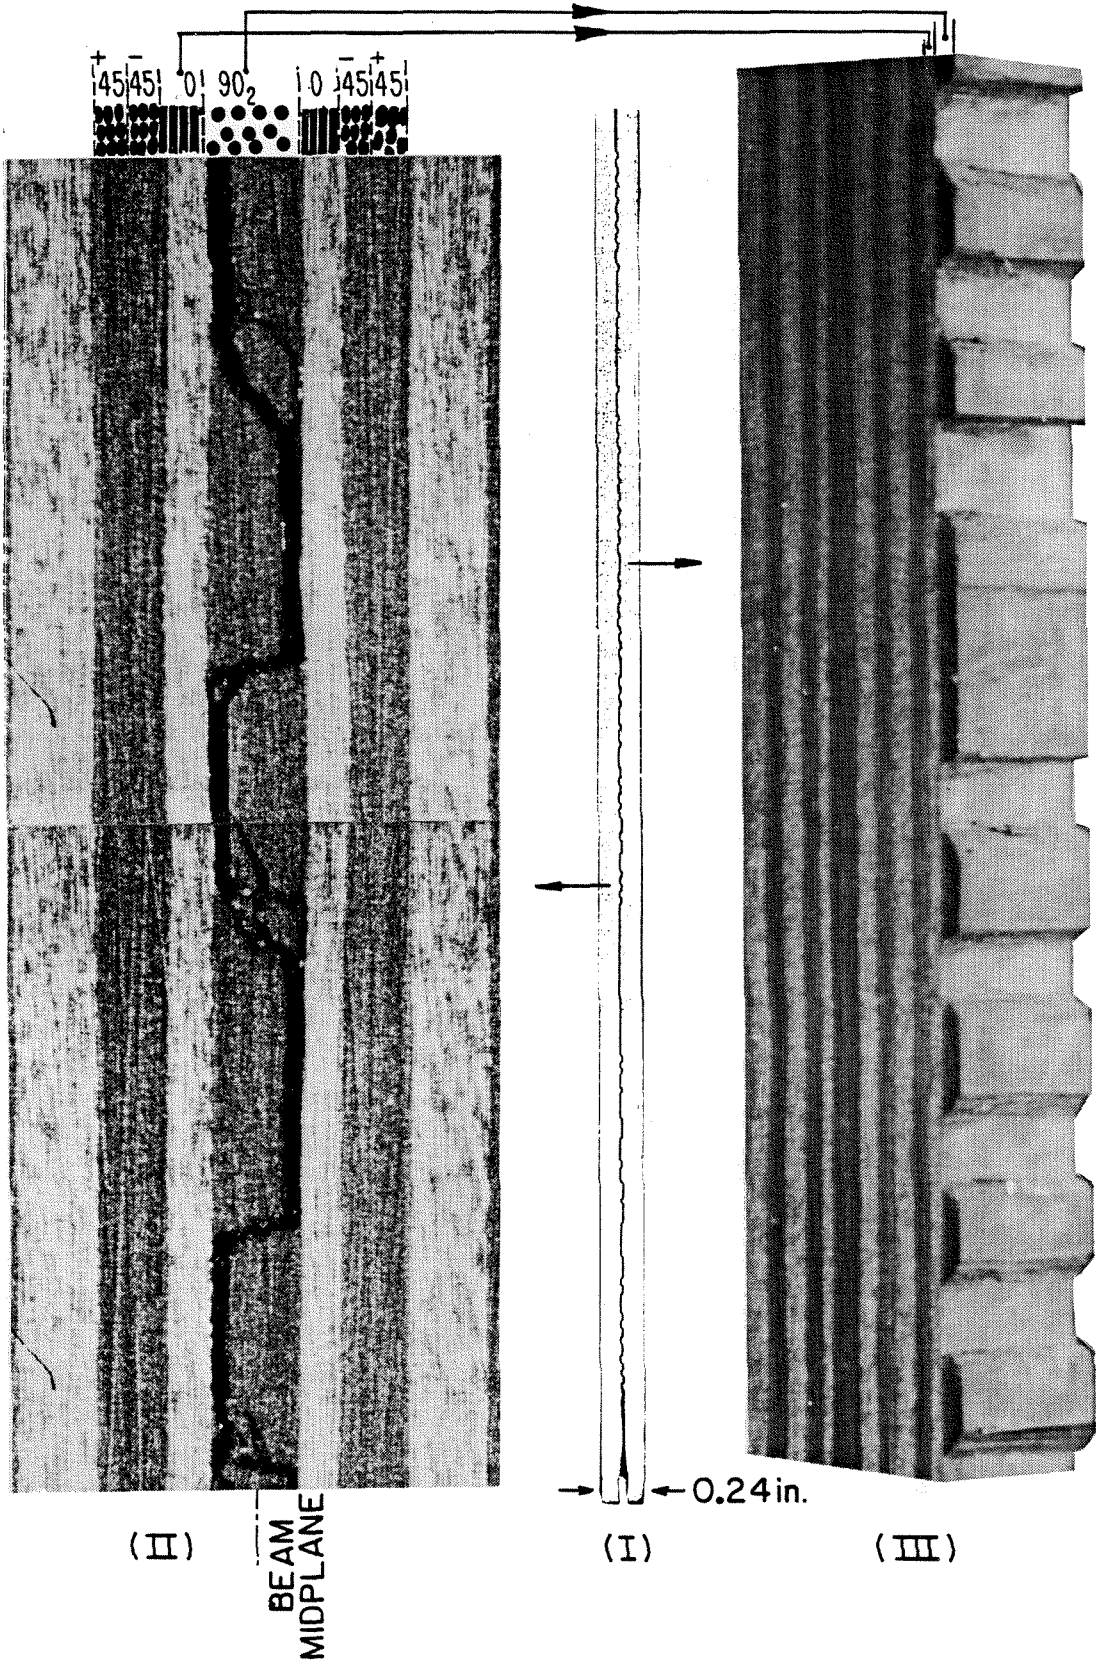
FRACTURE SURFACE OF A 48-PLY T300/5208 LAMINATE; TEST #A1
